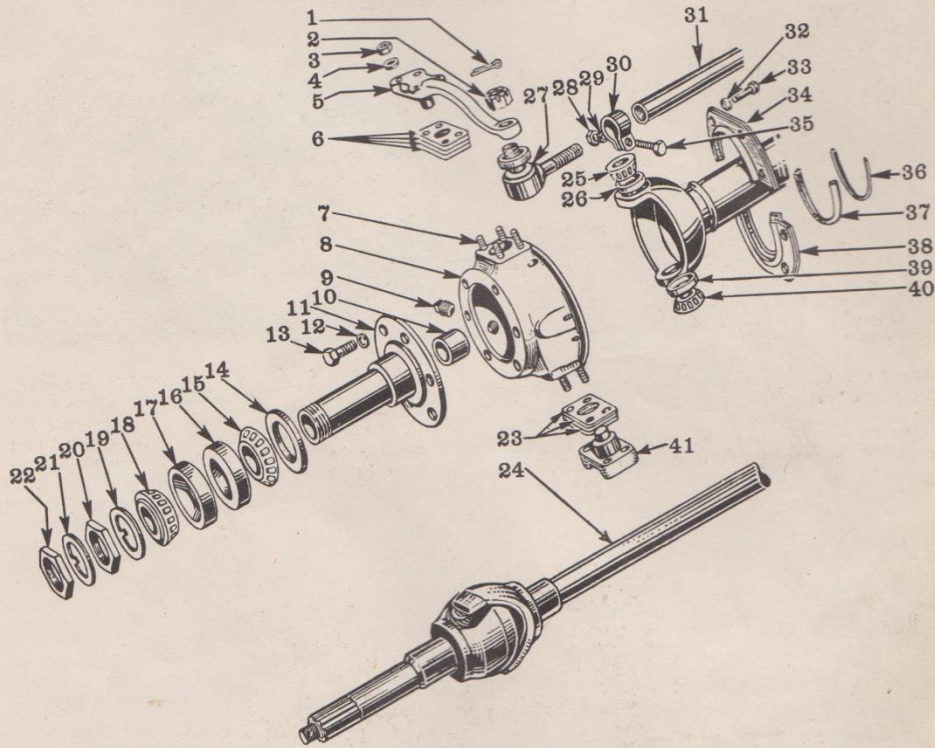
FRONT AXLE, STEERING KNUCKLE AND WHEEL BEARINGS
